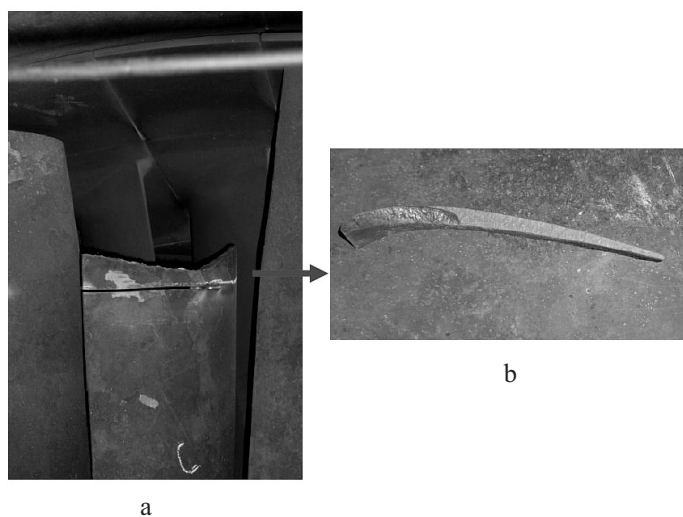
Broken blade (a); fracture surface of the broken blade with fatigue marks (b).
